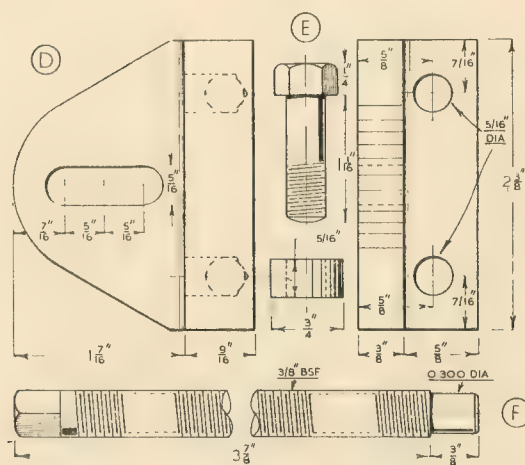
The moving jaw—D; the clamp-screw and collar—E; the jack-screw—F
